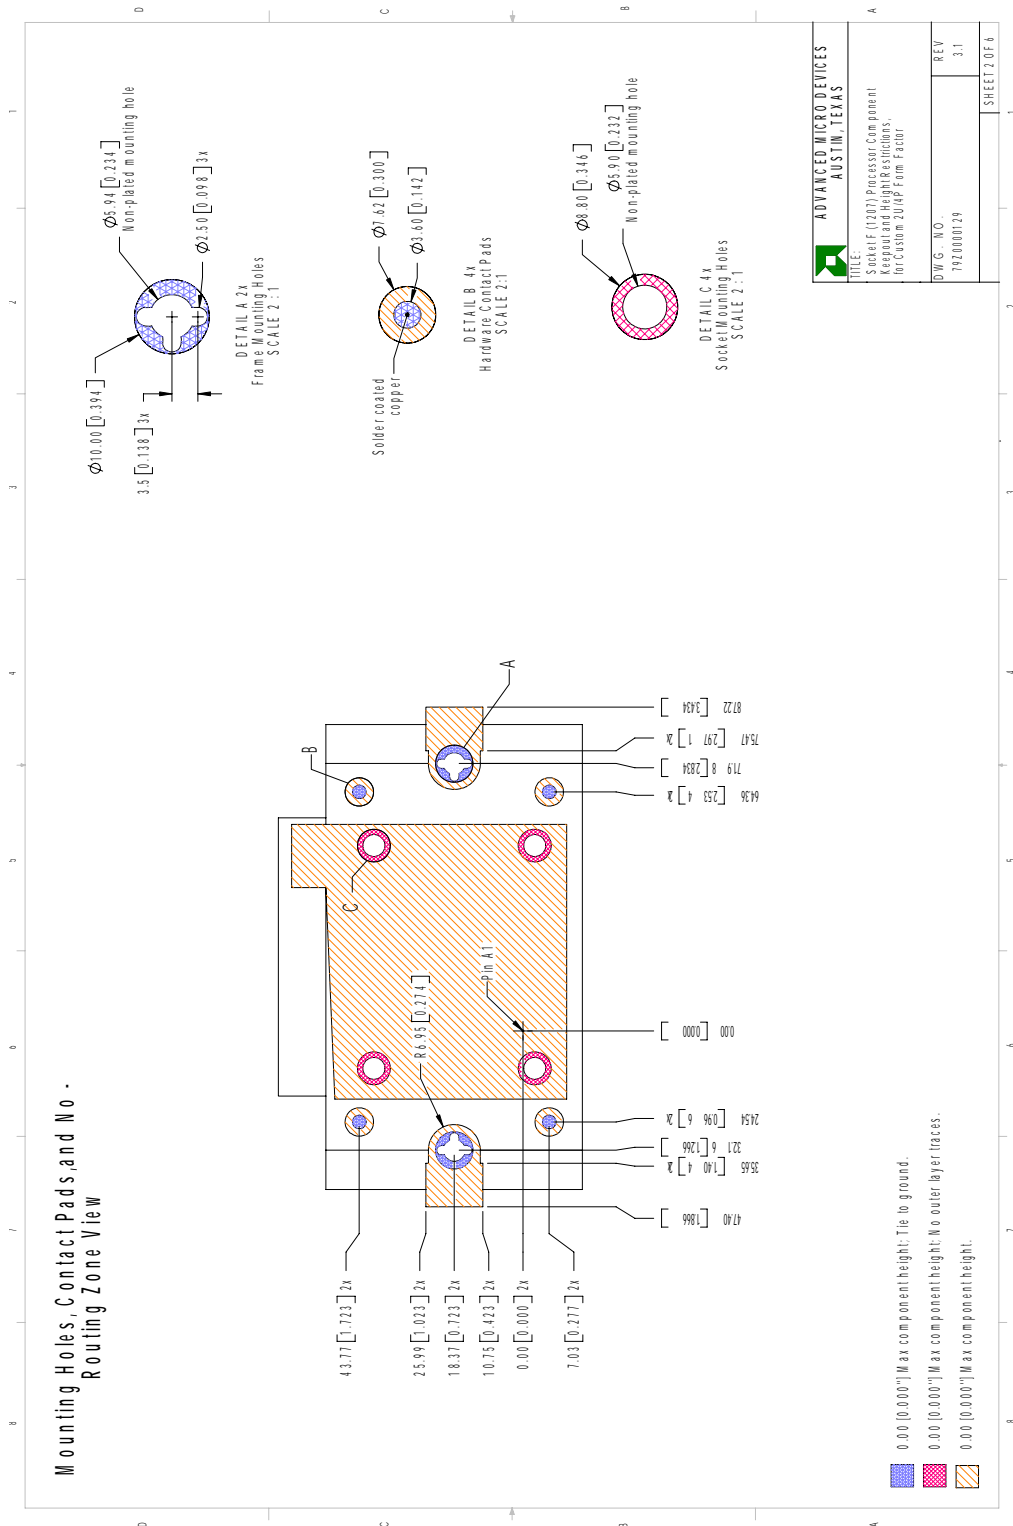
Socket F (1207) 2U-4P Mounting Holes, Contact Pads, and No-Routing Zone
